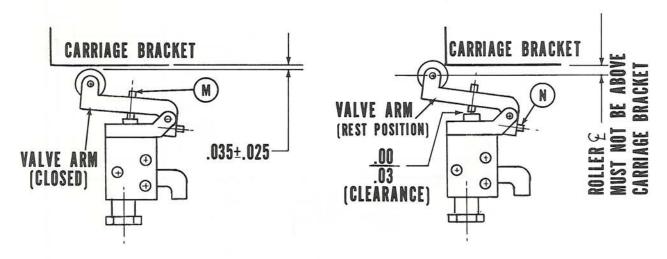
CUSHION VALVE-SIDE VIEW
